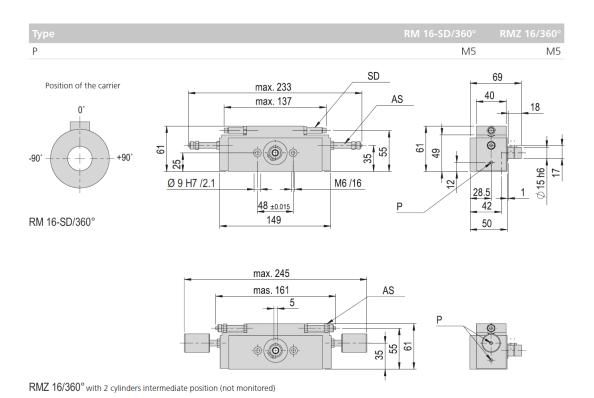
Dimensional drawing - Rotary module RM 16 / 360°
